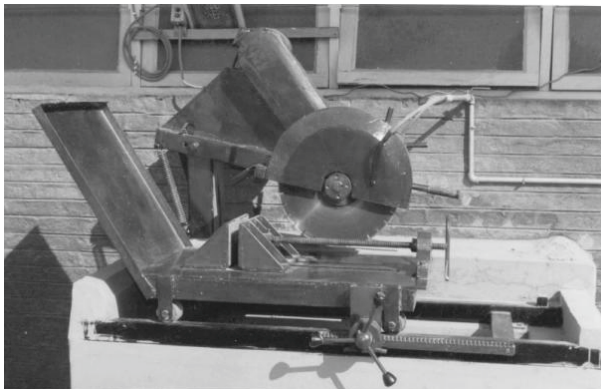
A VIEW OF DISK GRINDER MACHINE FOR CUTTING CUBES FROM CLAY BEAMS
